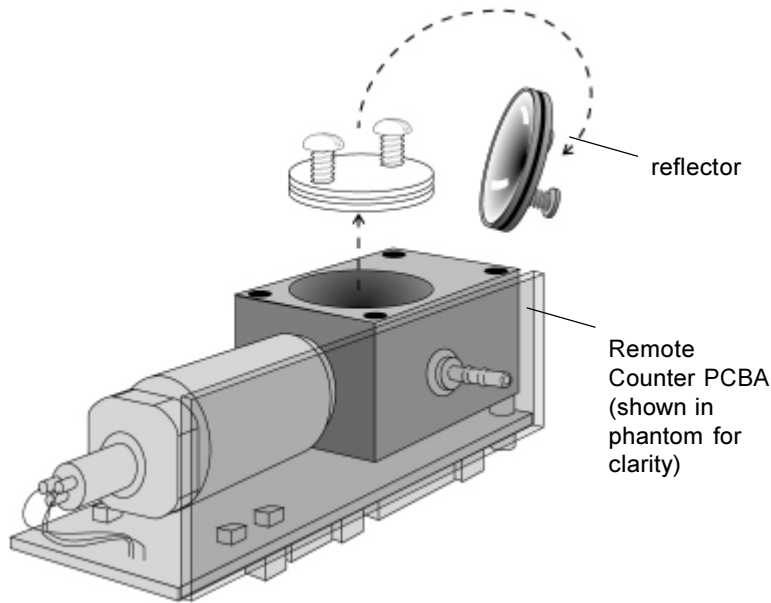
Sensor Cleaning (mini-remote PCBA shown removed for clarity)
